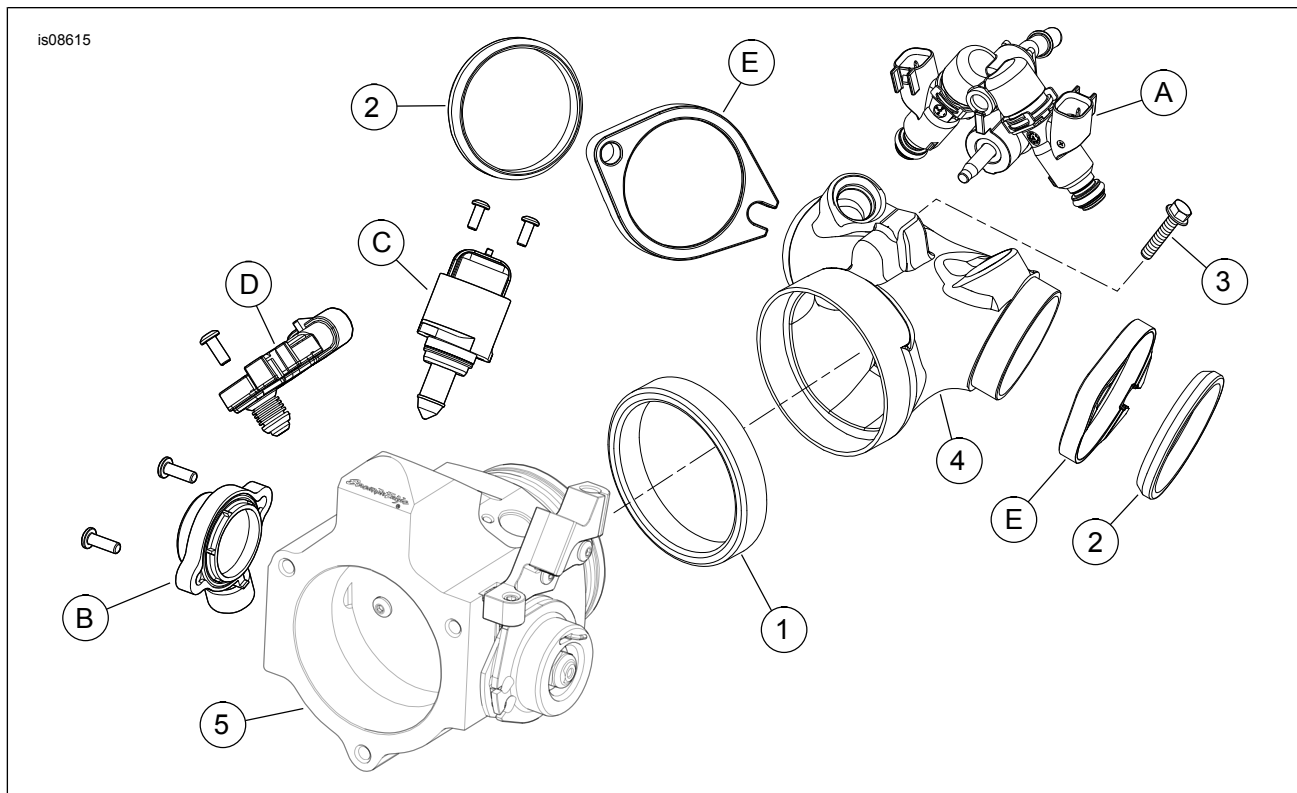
Service Parts: 58 mm EFI Throttle Body and Intake Manifold
